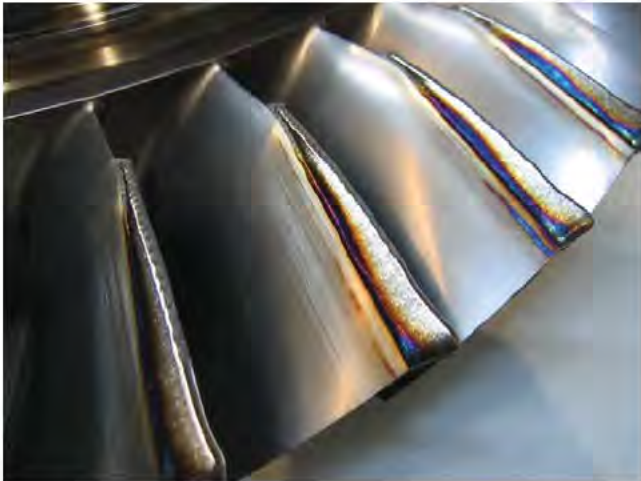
Turbine blade edges repair using the LMD technology [IWS, 2017]
